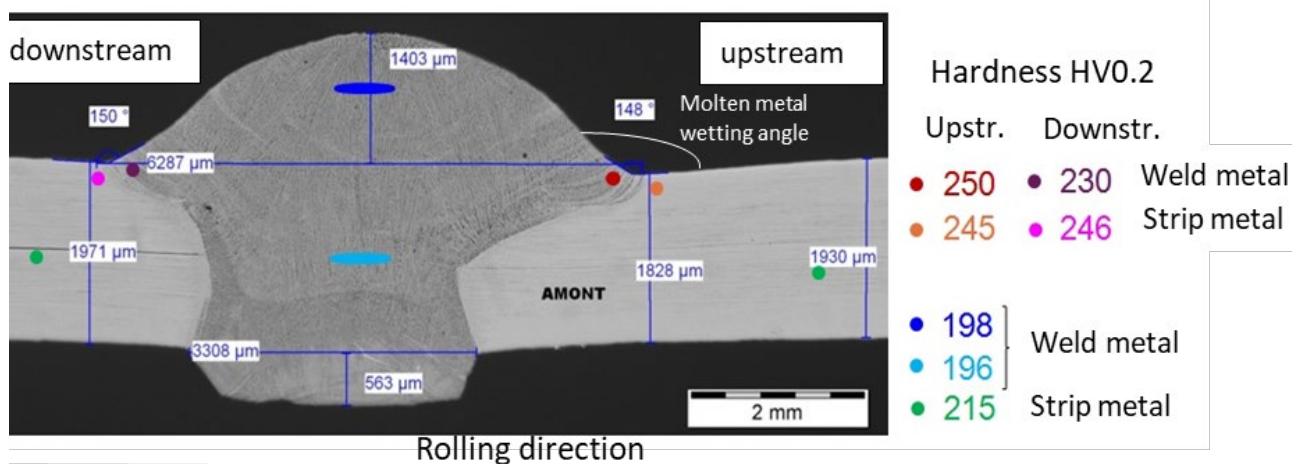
Cross section of a real weld line after the scale-breaker. Strip metal: hot rolled AISI 304L, weld metal: filler wires ER 310 or ER 316LSi.
